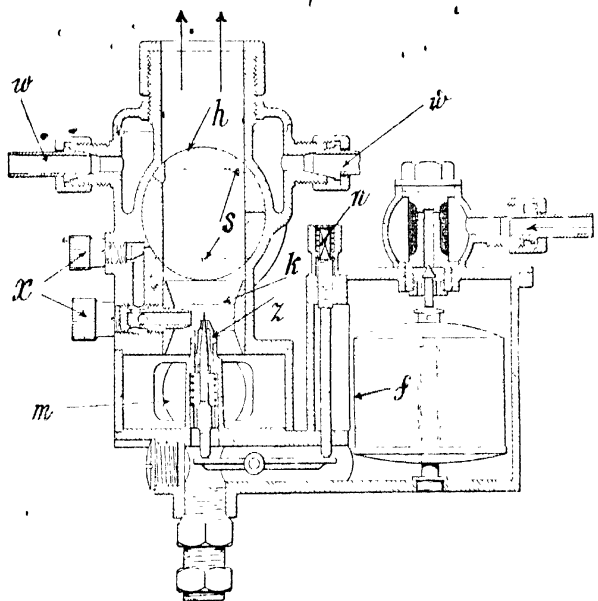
Plug throttle carburettor with adjustable glandless fuel nozzle and auxiliary mixture nozzles for starting and running slow — Sthenos
